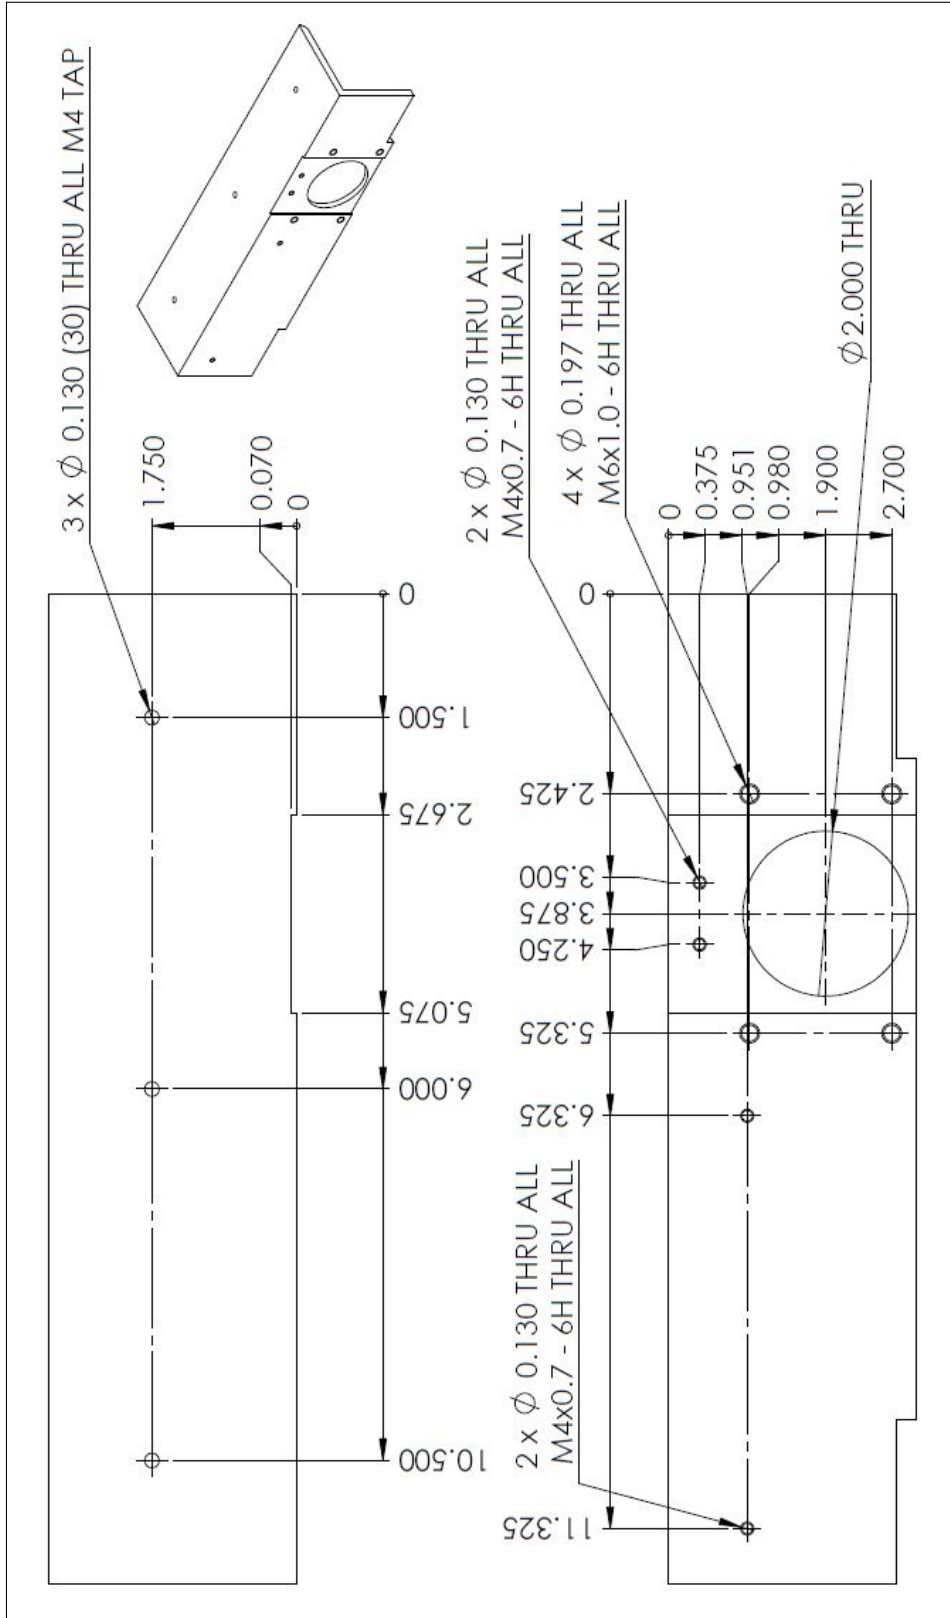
Mobile Base - Mounting Angle Detail. Material: Aluminum. UNLESS OTHERWISE SPECIFIED, ALL DIMENSIONS ARE IN INCHES.
